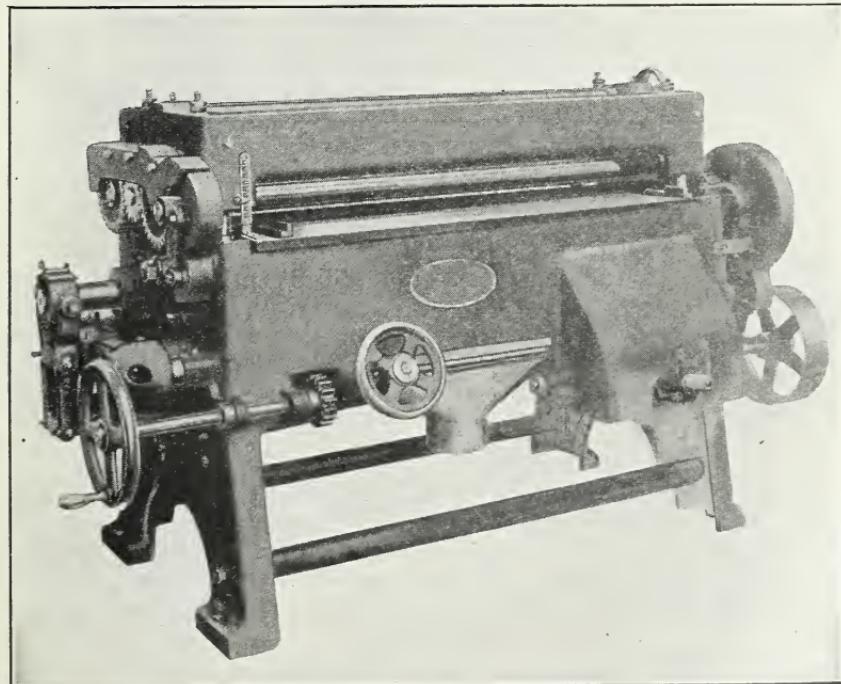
A single-drum sander is suitable for modern dimension-stock manufacture.
